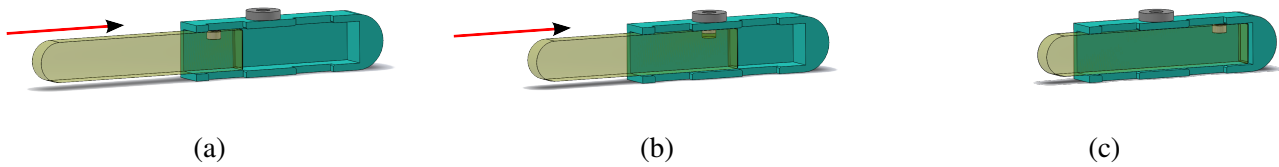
The friction-based locking device test bench consists in pushing the sliding bar in the rectangular tube fixed to a load cell. Transition from (a) to (b) checks whether the magnet properly pulls the shaft out of its socket, locking the mechanism. Transition from (b) to (c) evinces the triggering force required to unlock the device.
